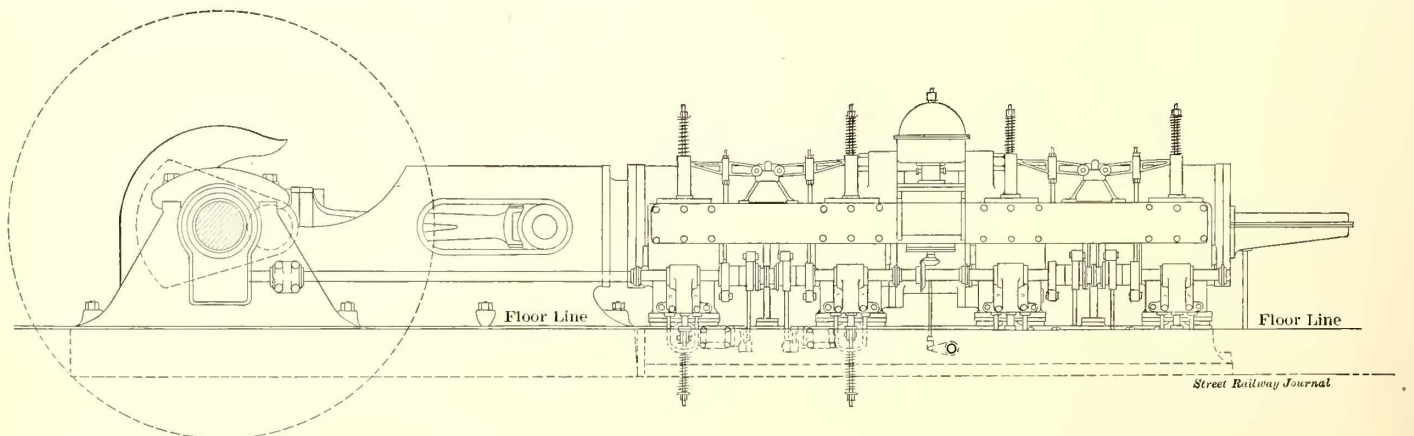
LONGITUDINAL SECTION OF 1500-HP DOUBLE-CRANK HORIZONTAL GAS ENGINE
